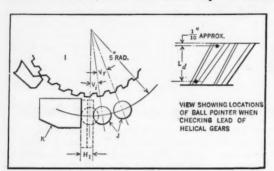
View showing locations of ball pointer when checking lead of helical gears.
